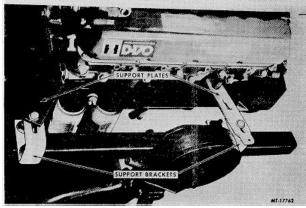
Engine Stand Support Brackets and Plates (Left Side)
